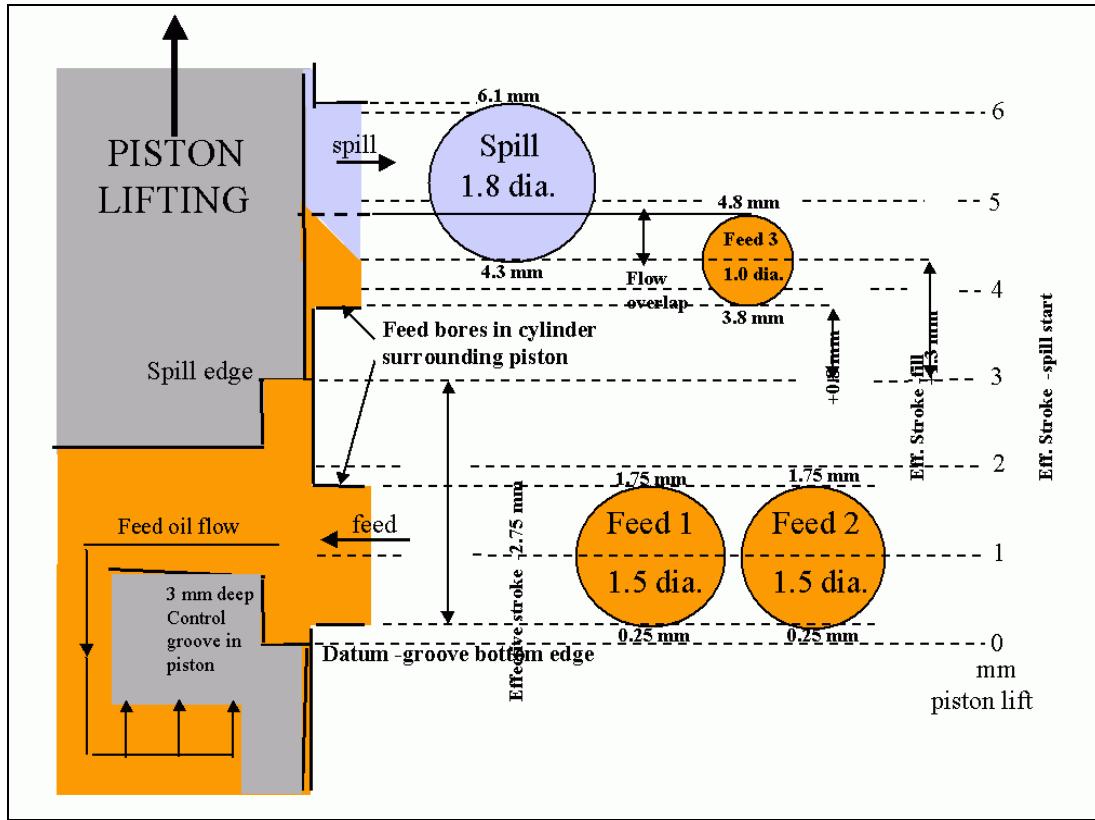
Layout of Oil Feed and Spill Ports against the Actuator Piston Groove
